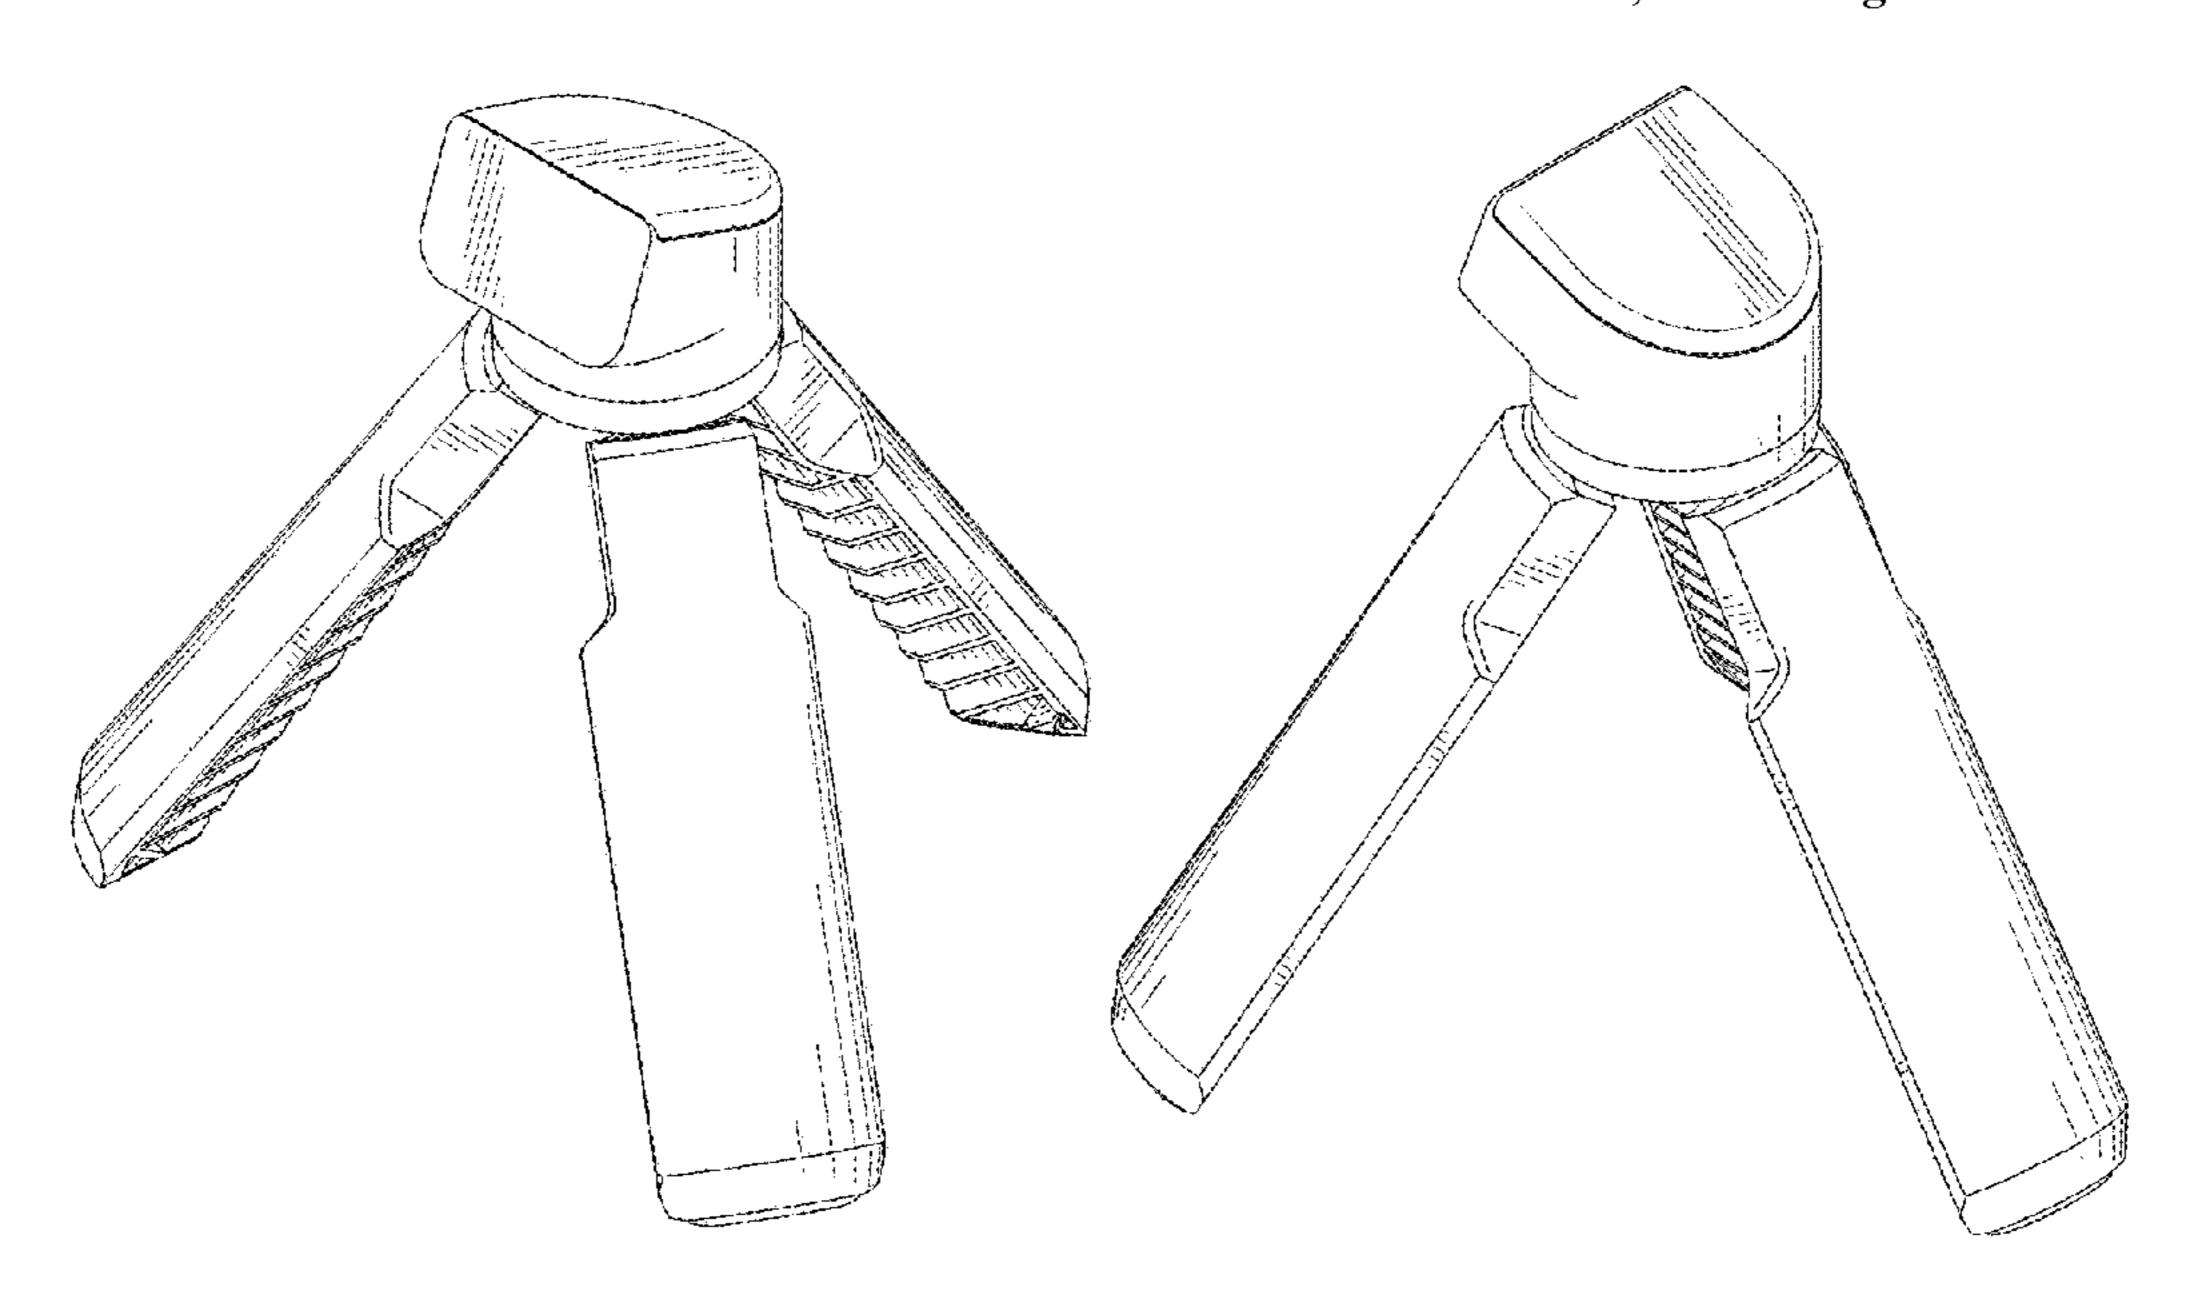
is a left side view of the electronic device mount; FIG. 6 is a right side view of the electronic device mount;
